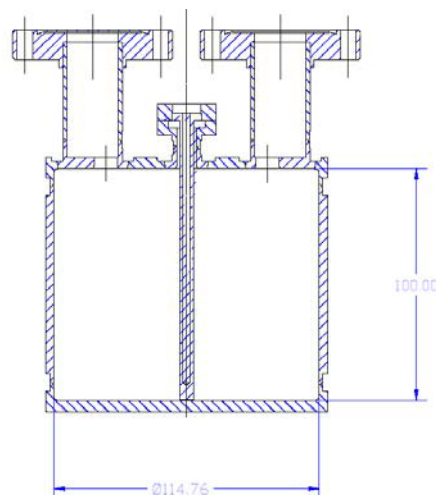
Geometry of the coaxial TE₀₁₁ cavity. Dimensions are in mm.
